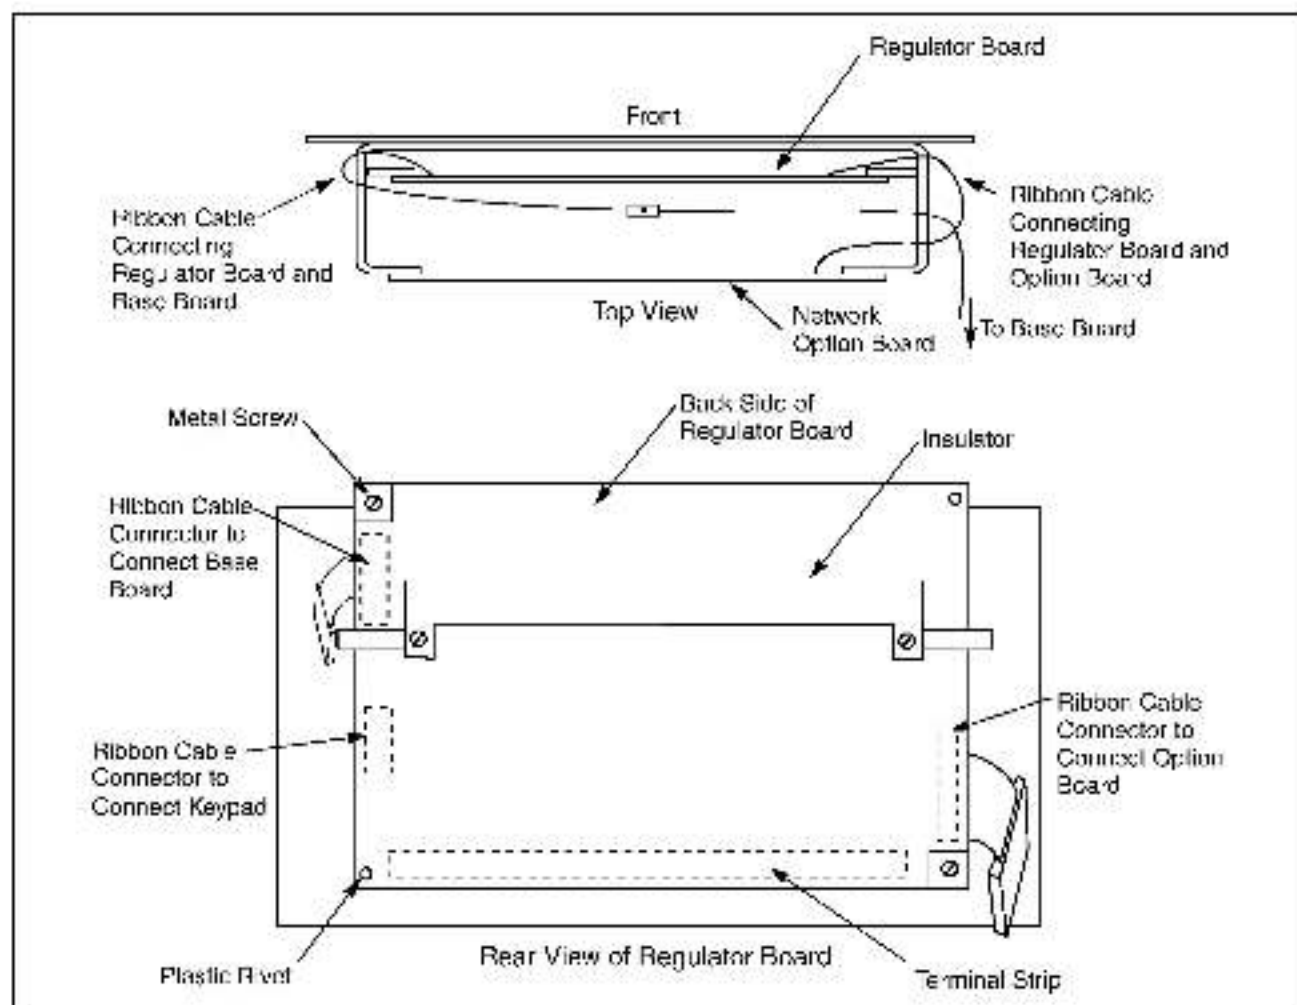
Regulator Board's Connections to Option Board, Keypad, and Base Board
